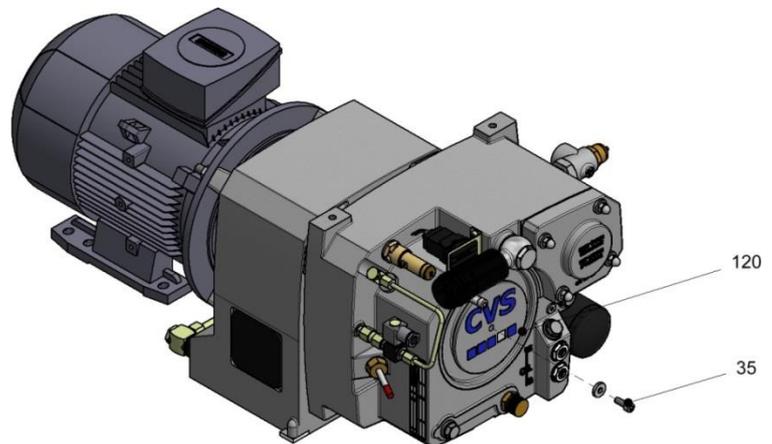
Unscrewing the cylinder head screw (Pos. 35)
